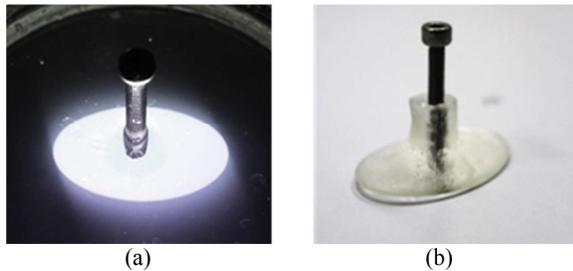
Print a screw thread (a) a physical screw is placed in the resin to create the internal structure for a thread (b) the screw can tightly fit into the thread
